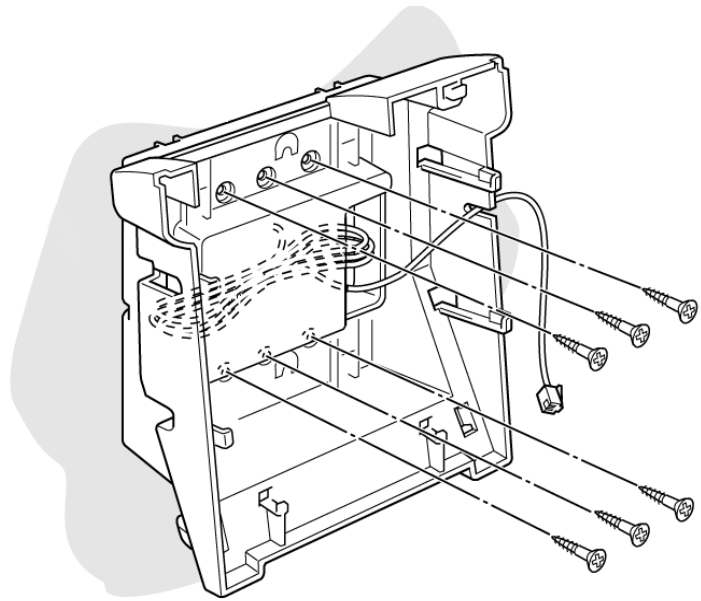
Attaching the Wall Mount Unit to the Wall
